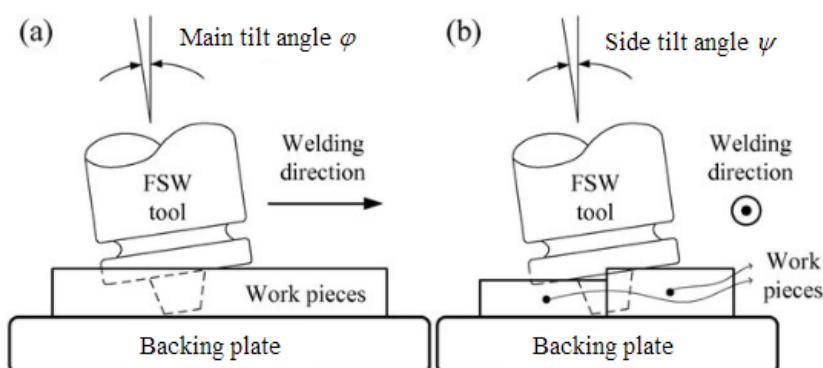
Main tilt angle φ and side tilt angle ψ of FSW tool
